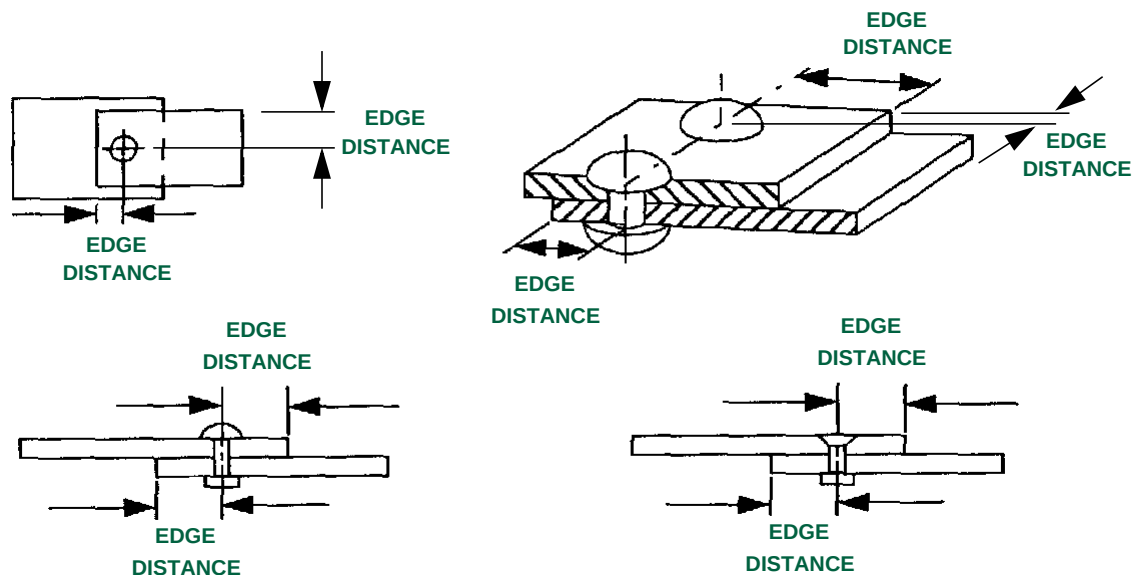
EDGE DISTANCE FOR FASTENER HOLES
